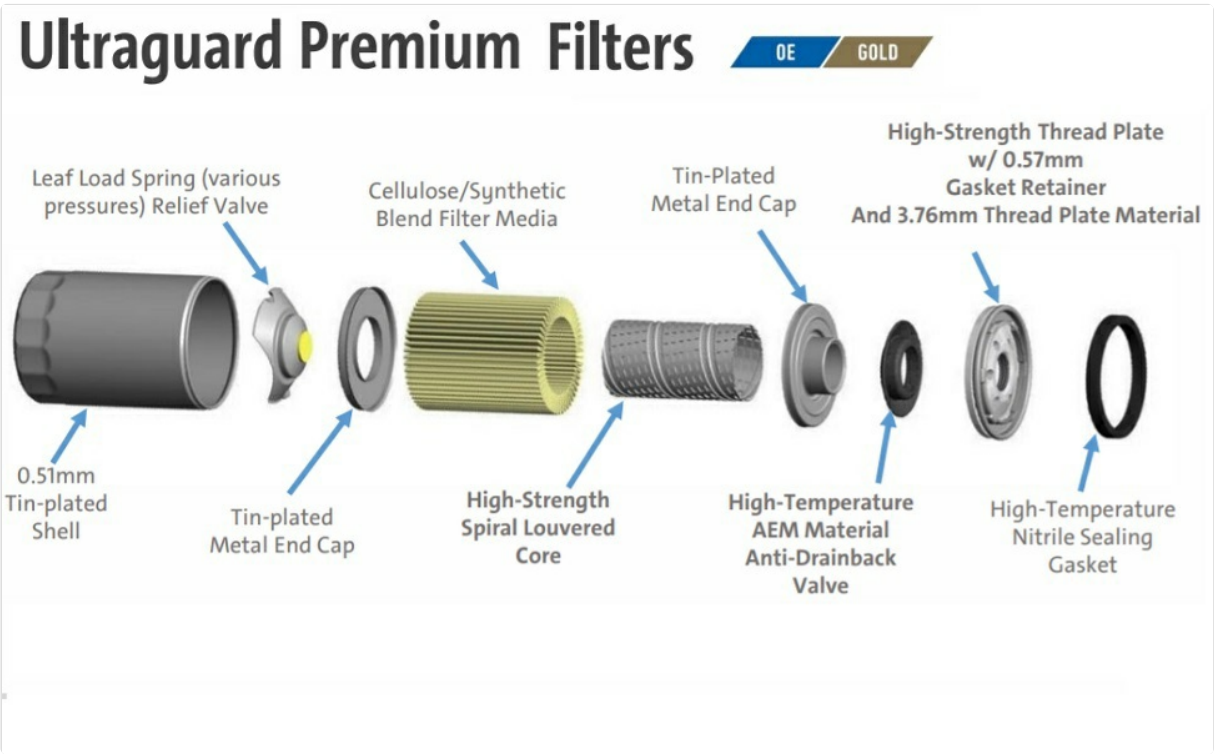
Exploded view of an ACDelco Ultraguard Premium Filter, detailing its various components and materials.
